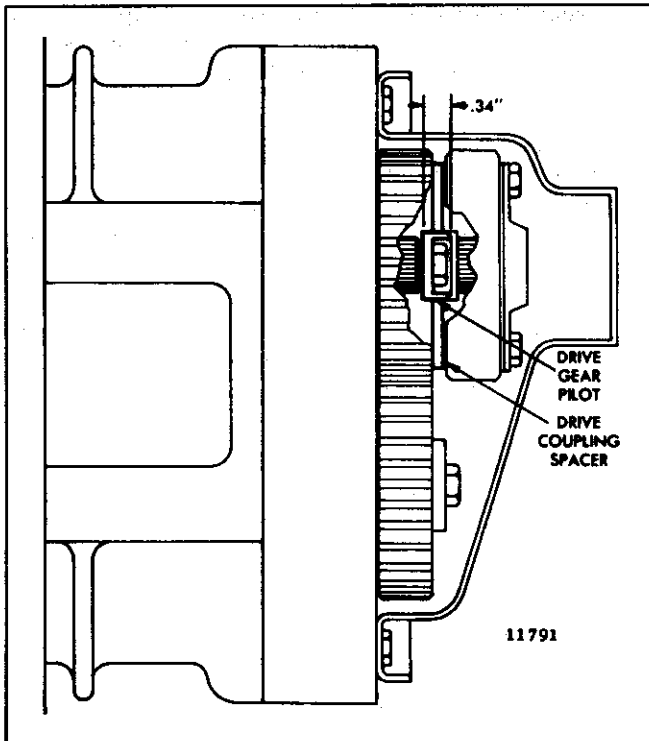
Current Pilot and Spacer Used on 4-53 Blower
